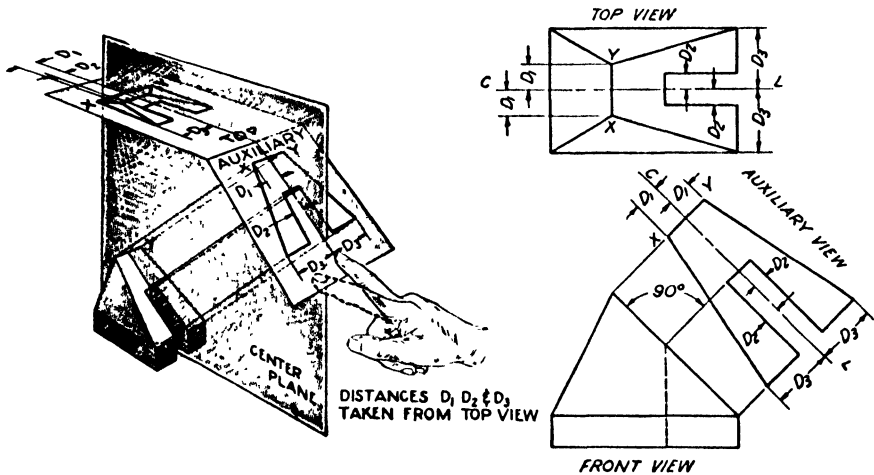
A symmetrical auxiliary view of an inclined surface.
